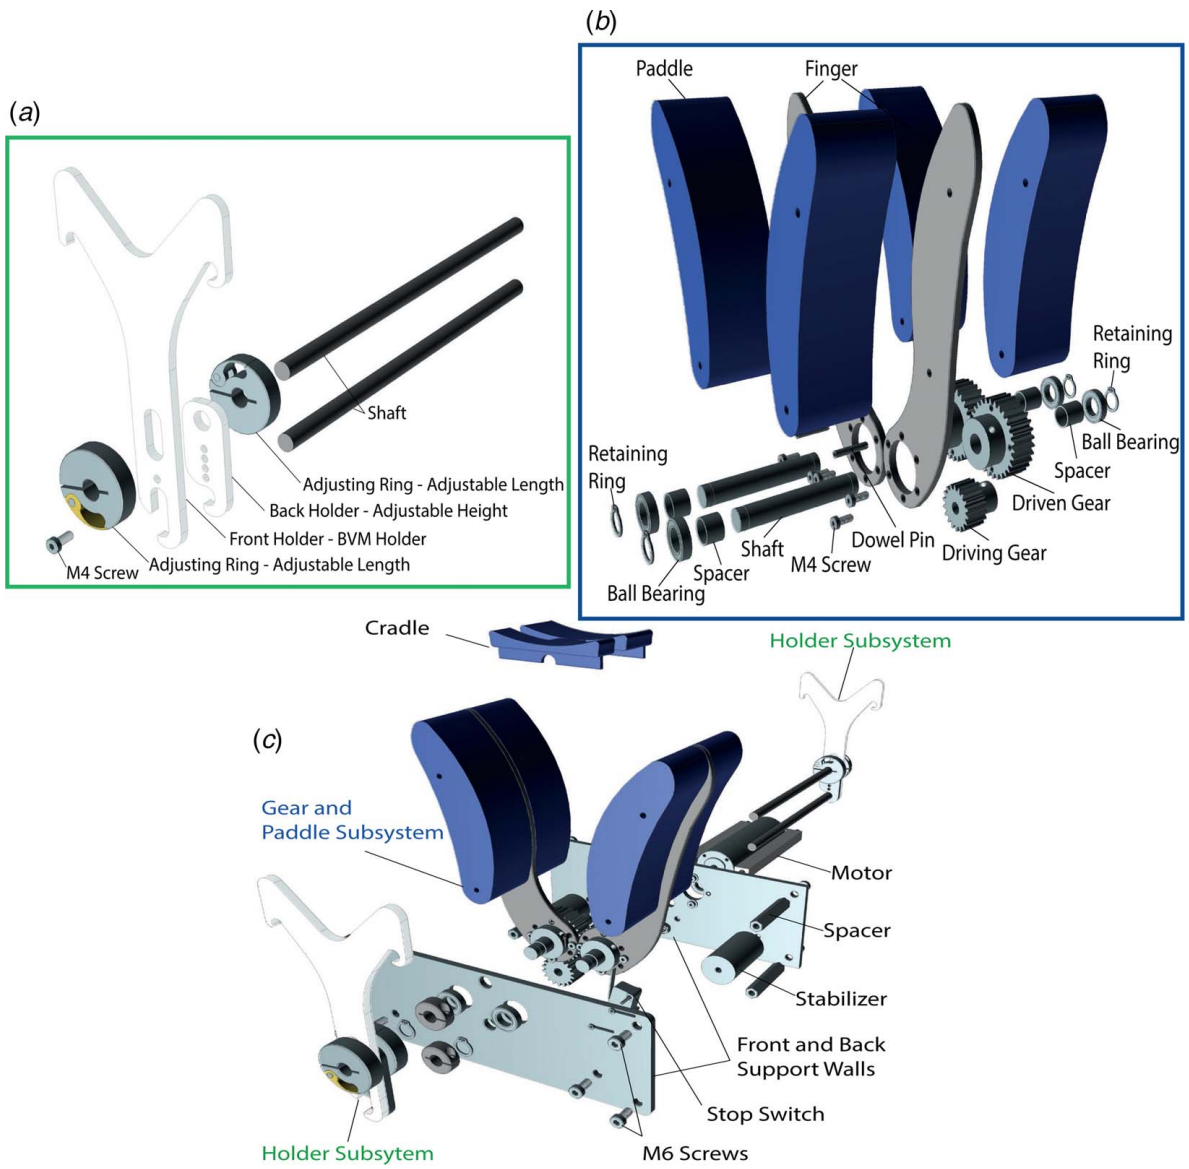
Mechanical design exploded model: (a) holder assembly, (b) gear and paddle assembly, and (c) exploded view
